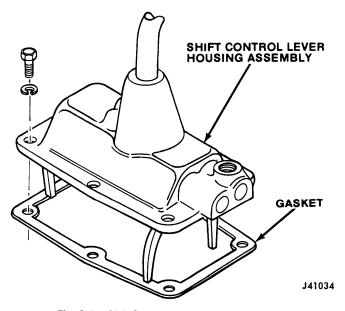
Shift Control Lever Housing Assembly —3-Speed Transmission
